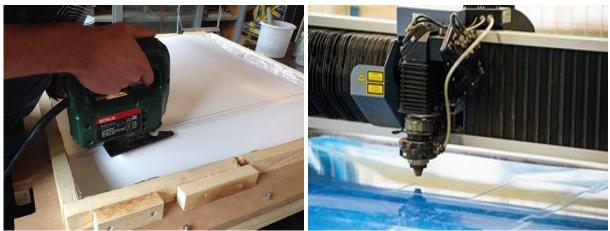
The VaCo Mould nowadays & Figure 152b: The VaCo Mould in the future: Built-in 3D laser cutter (Schuerman, n.d.)
